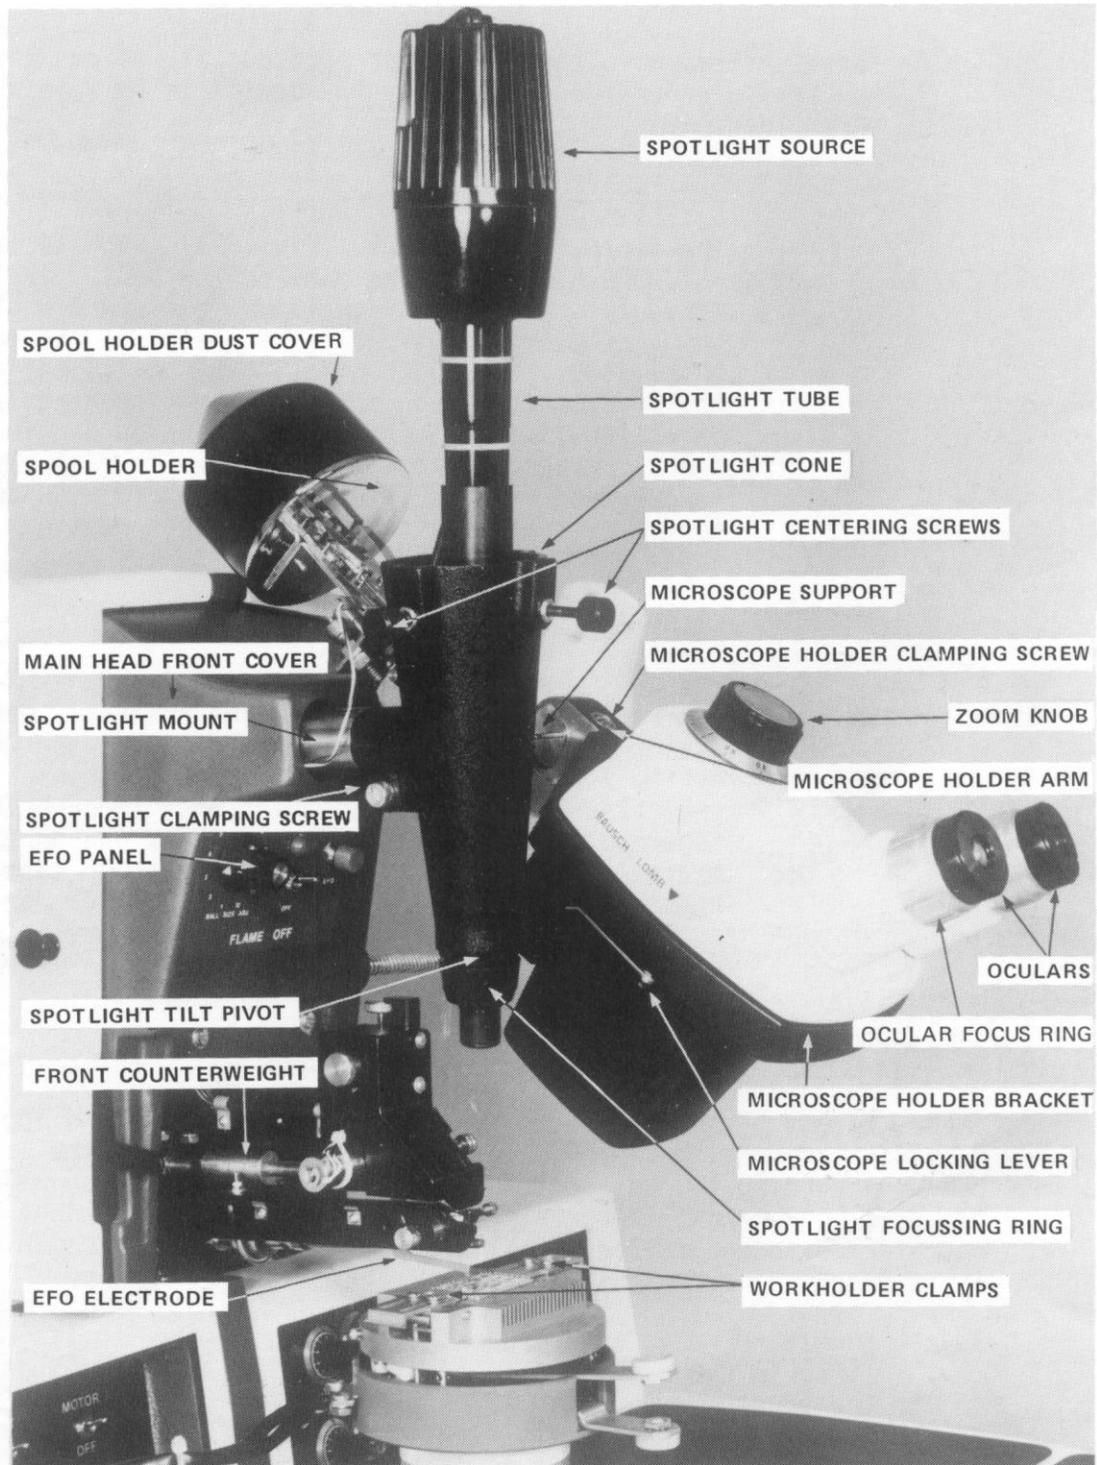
MODEL 4124 BALL BONDER – FRONT PARTS
